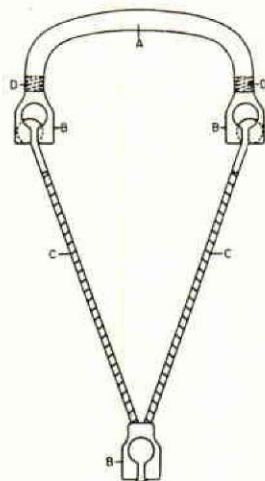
Muscle Pin and Linkage Unit. A- $\frac{1}{4}$ " Stainless steel rod 4" long. B-Ball and Socket Fittings. C-Northrup Arm Cables 4" long. D-Note that ball and socket fittings are internally threaded to "A".
